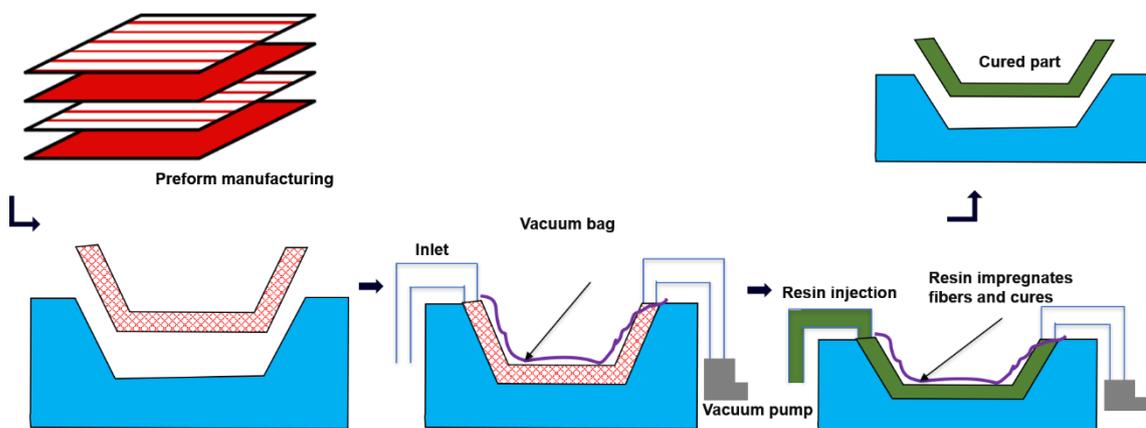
Illustration of vacuum assisted resin transfer molding (VARTM) process
